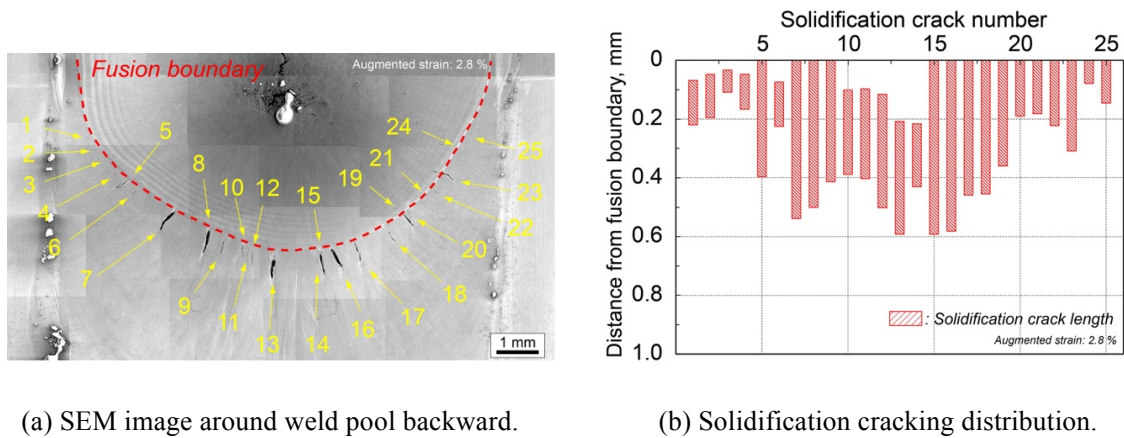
Result of trans-varestraint test by arc welding on weld bead.
